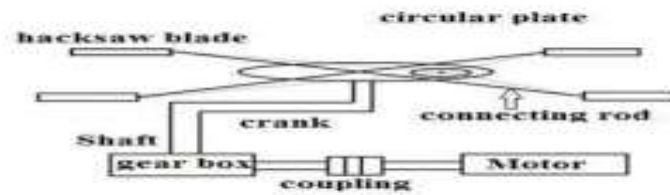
Crank-type Diagram of Hacksaw Machine
